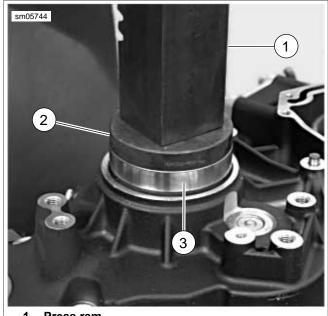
Installing Main Drive Gear Bearing: XL Models
